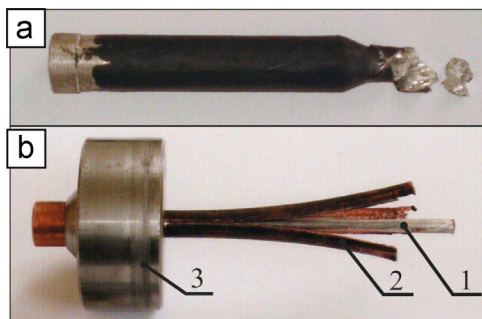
Appearance of magnesium after hydrostatic extrusion at room temperature: (a) a destroyed workpiece after experiment using conventional technique and (b) a successful experiment with workpiece (1) which was placed in a self-destroying shell (2) and passed through the die (3).
